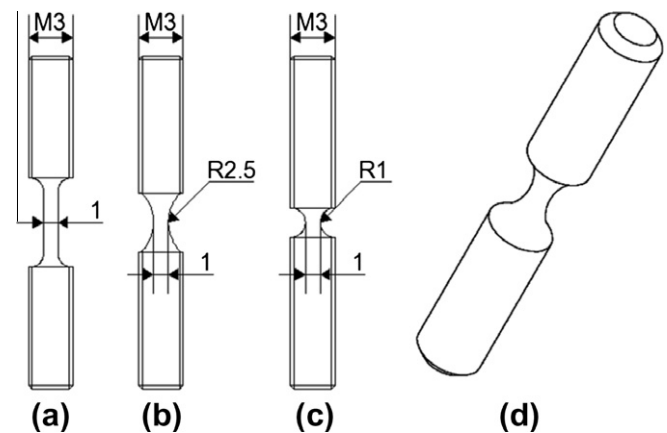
Tensile samples used: (a) smooth specimen; (b) 2.5 mm radius notched specimen; (c) 1 mm radius notched specimen; (d) 3-D view.
